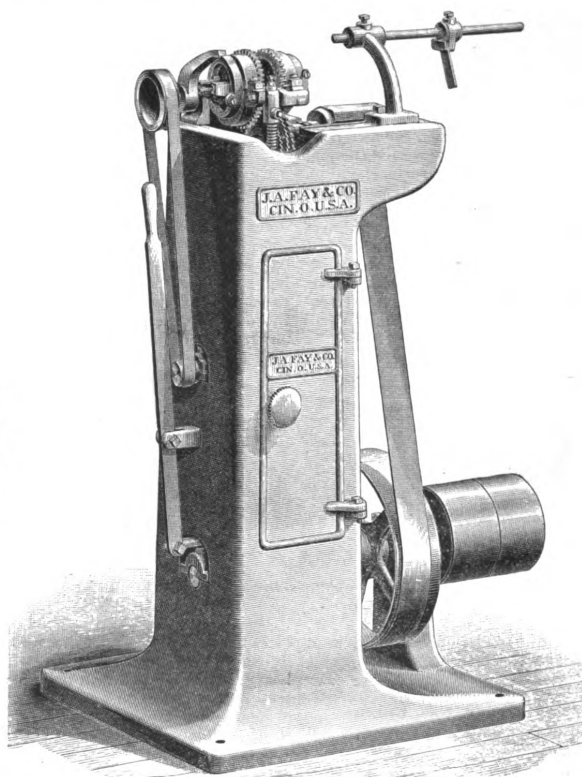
Blind-Slat-Tenoning Machine, Made by J. A. Fay & Co.
